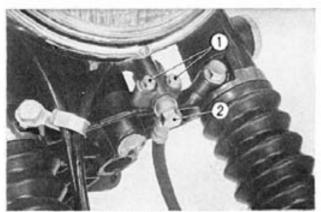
(1) Joint mounting bolt (2) Joint bolt
